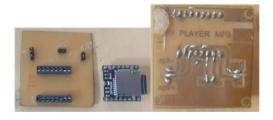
Plate audio system front view and rear view welded tracks
